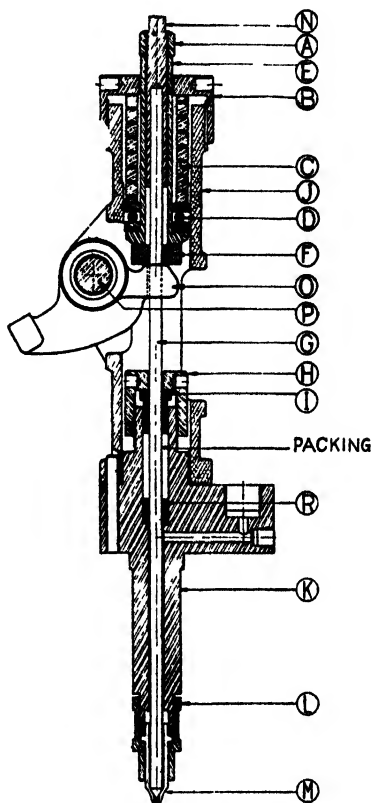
Cam-operated spray valve of Atlas-Imperial Diesel, with the parts labeled as follows: A = spindle-adjustment lock nut; B = spring nut; C = spring; D = ball thrust bearing; E = spindle extension sleeve; F = spray-valve spindle collar; G = spray-valve stem; H = gland nut; I = packing gland; J = spray-valve spring casing; K = spray-valve body; L = spray-valve seat nut; M = spray tip; N = spindle extension; O = rocker; P = rocker pin; R = lower gland.
